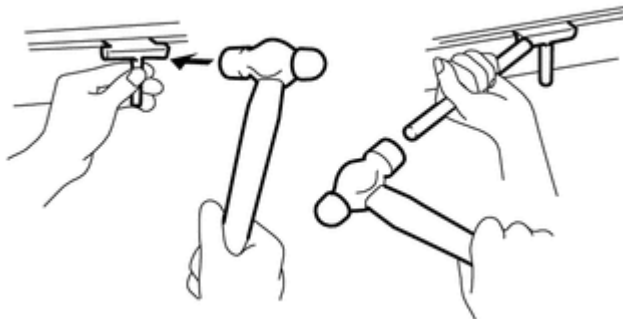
Inserting Oil Pan Seal Cutter Between No. 2 Oil Pan Sub-Assembly And Stiffening Crankcase Assembly
